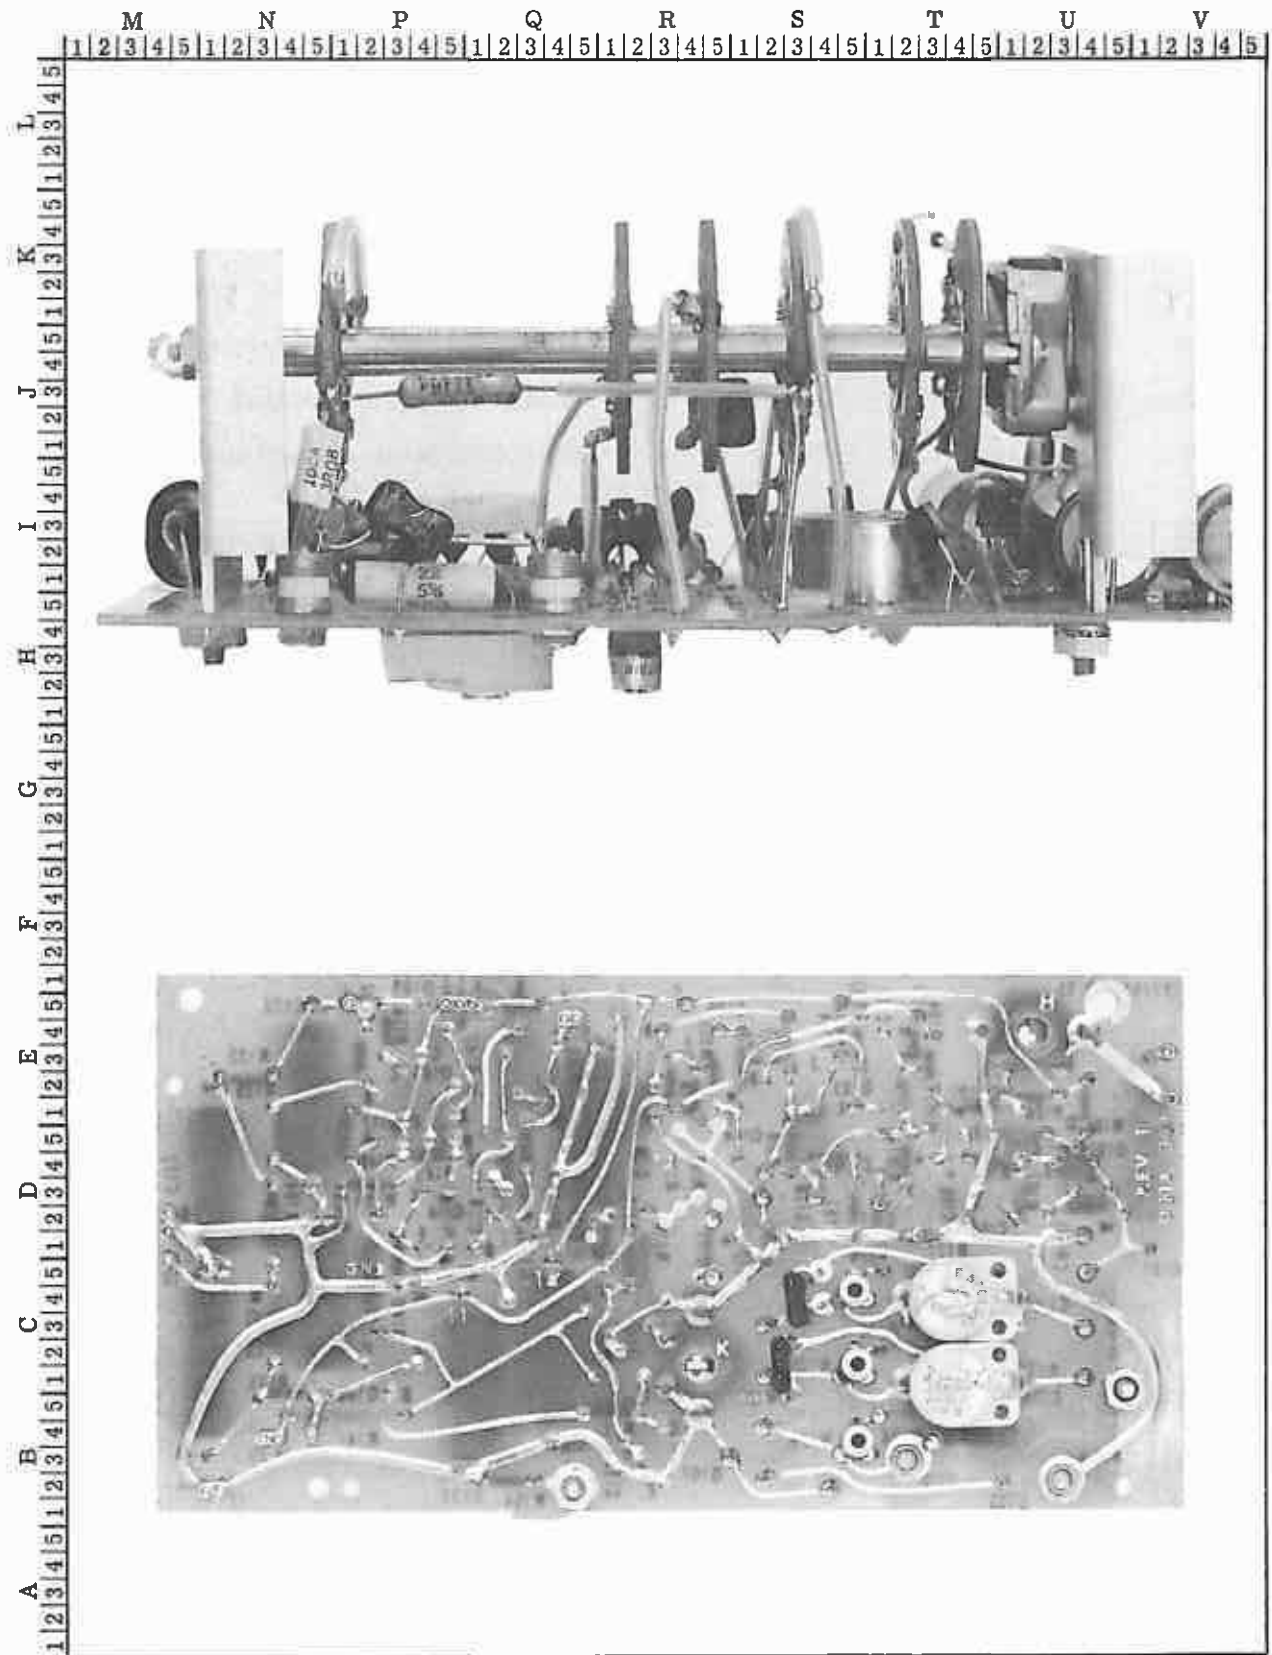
INPUT AMPLIFIER AND POWER SUPPLY ASSEMBLY (Sheet 2 of 2)
